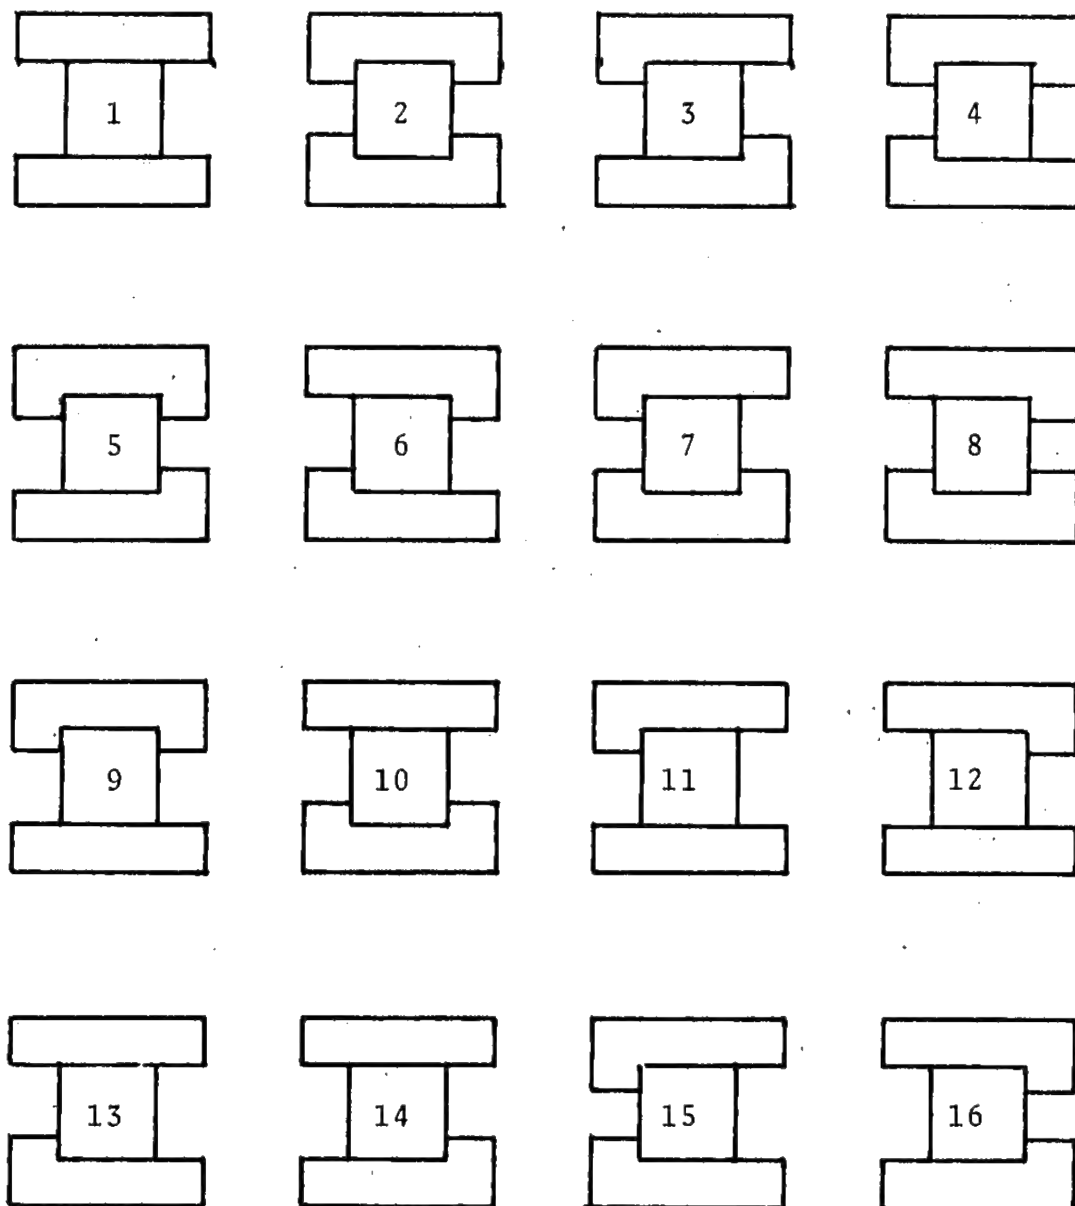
CYLINDRICAL ROLLER BEARING
